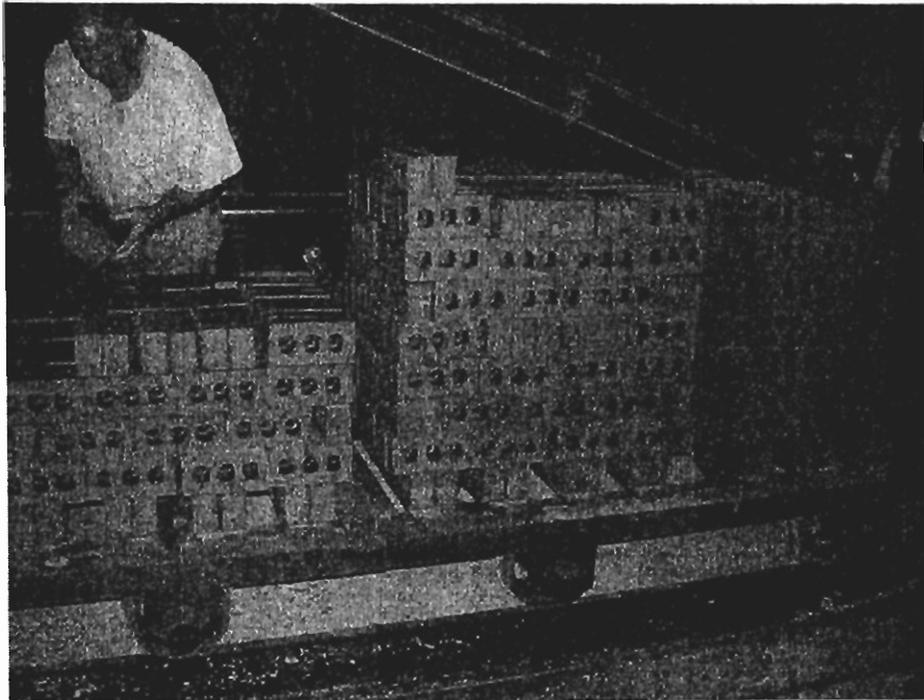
Scale-up extrusion at the brick plant produced three-hole green building bricks (700 bricks per car)
